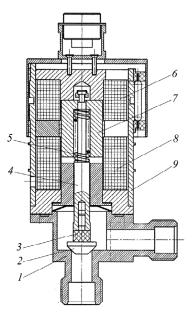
Experimental prototype of the valve with metal-to-metal lock unit:
